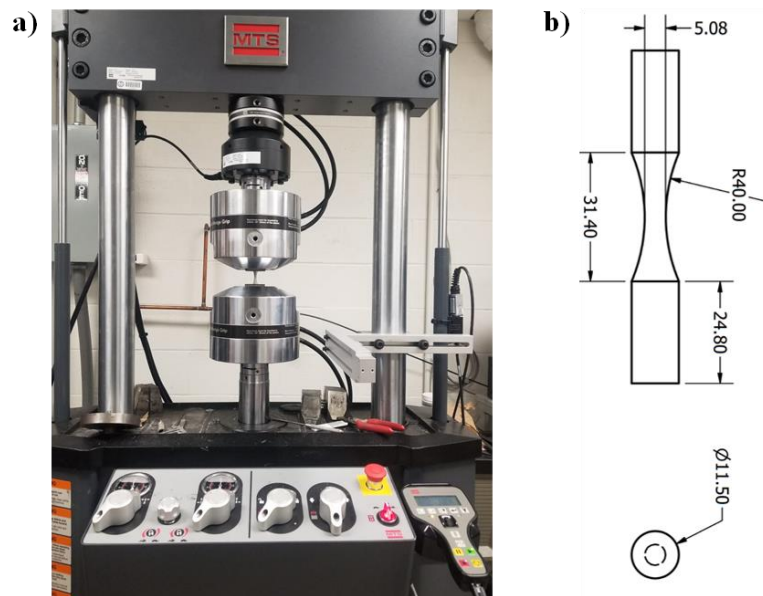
a) MTS 880 landmark machine, b) Fatigue test bar dimensions following ASTM E466-07 (measurements shown are in mm).
